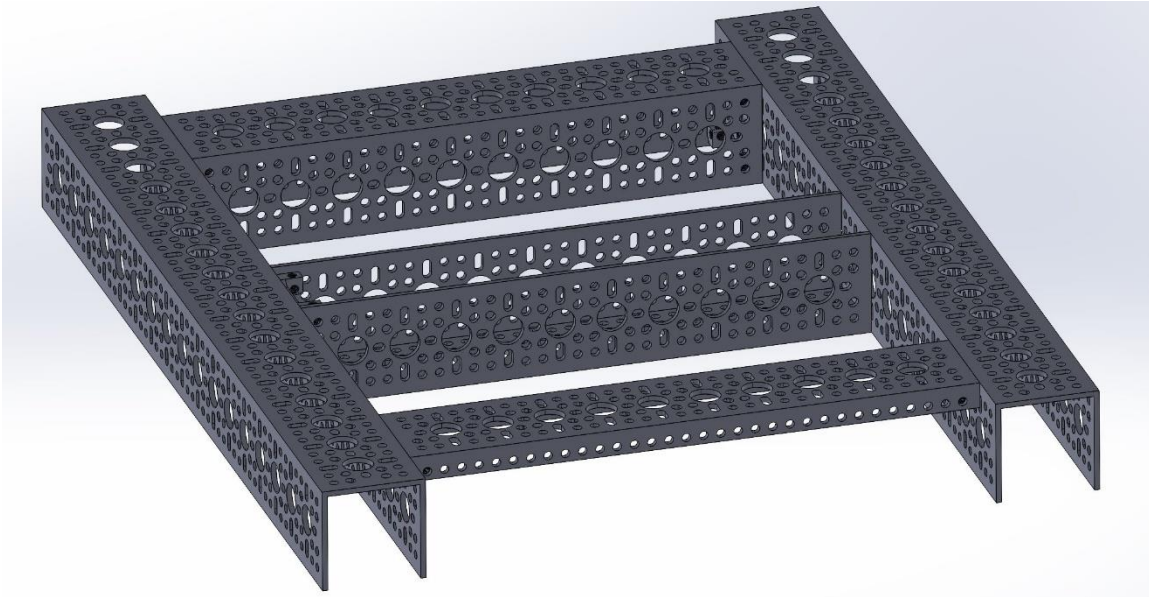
CAD of the mechanical chassis that makes up the mobile robot platform.
